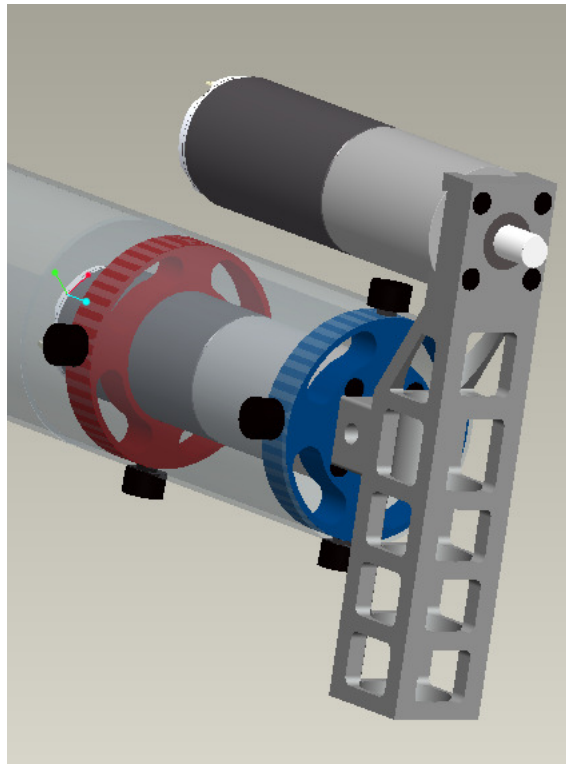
CAD drawing closeup of the boom (translucent) and upper leg assembly. The hip motor can be seen located inside the boom, and the leg length actuation motor is attached at the top of the leg. The four-bar and lower leg assembly are not shown here.
